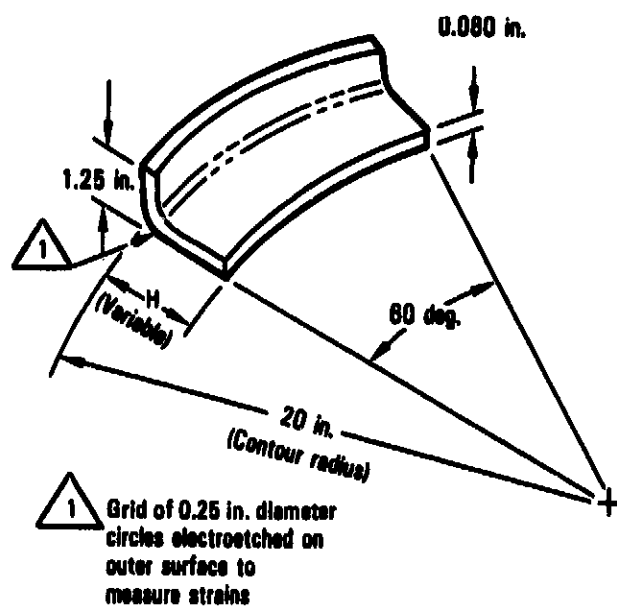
Stretch formed specimen configuration (heel-out angle).
